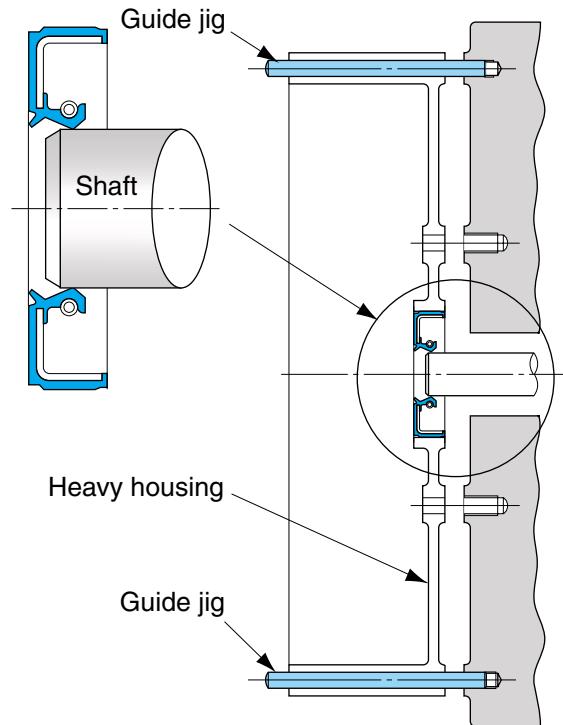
Guide jig for mounting of heavy housing with seal onto shaft
